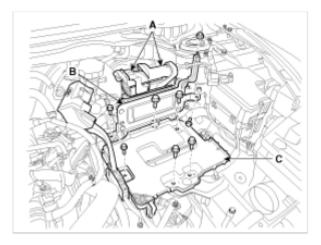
Identifying ECM, Connectors And Battery Tray Courtesy of HYUNDAI MOTOR AMERICA
